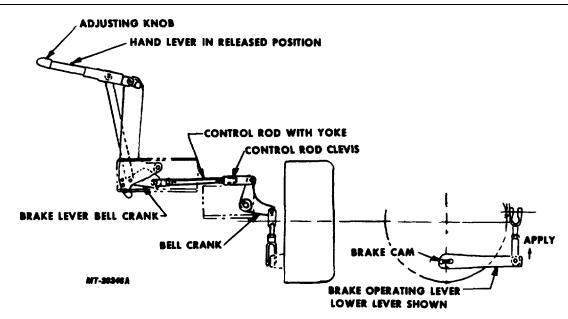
Parking Brake Adjustment in the Orscheln Hand Lever
